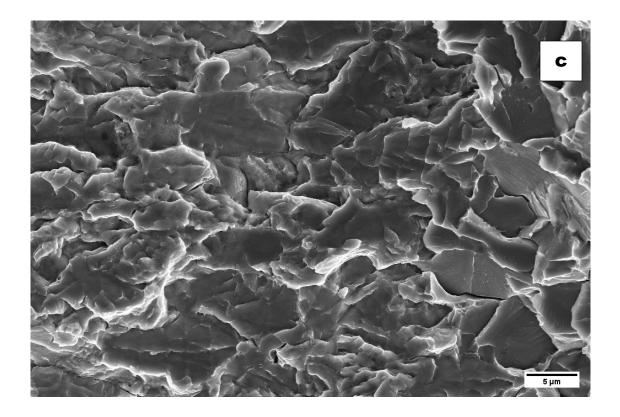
11: Fracture surface analysis of samples tested under Test 3 ($K_{max} = 36.3 \text{ MPa}\sqrt{m}$) in NNpH environment. Large striations were observed on the fracture surface. Crack direction is left to right. [17]
